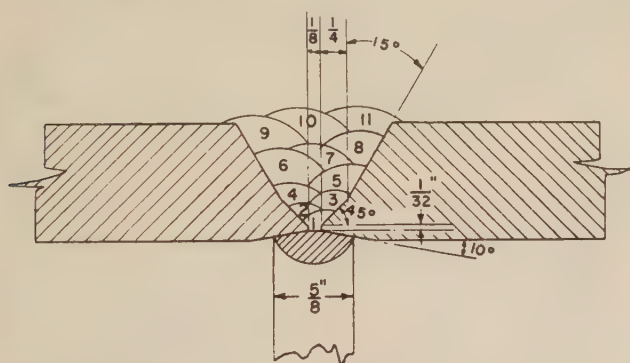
DETAILS OF V-TYPE WELDED JOINT
